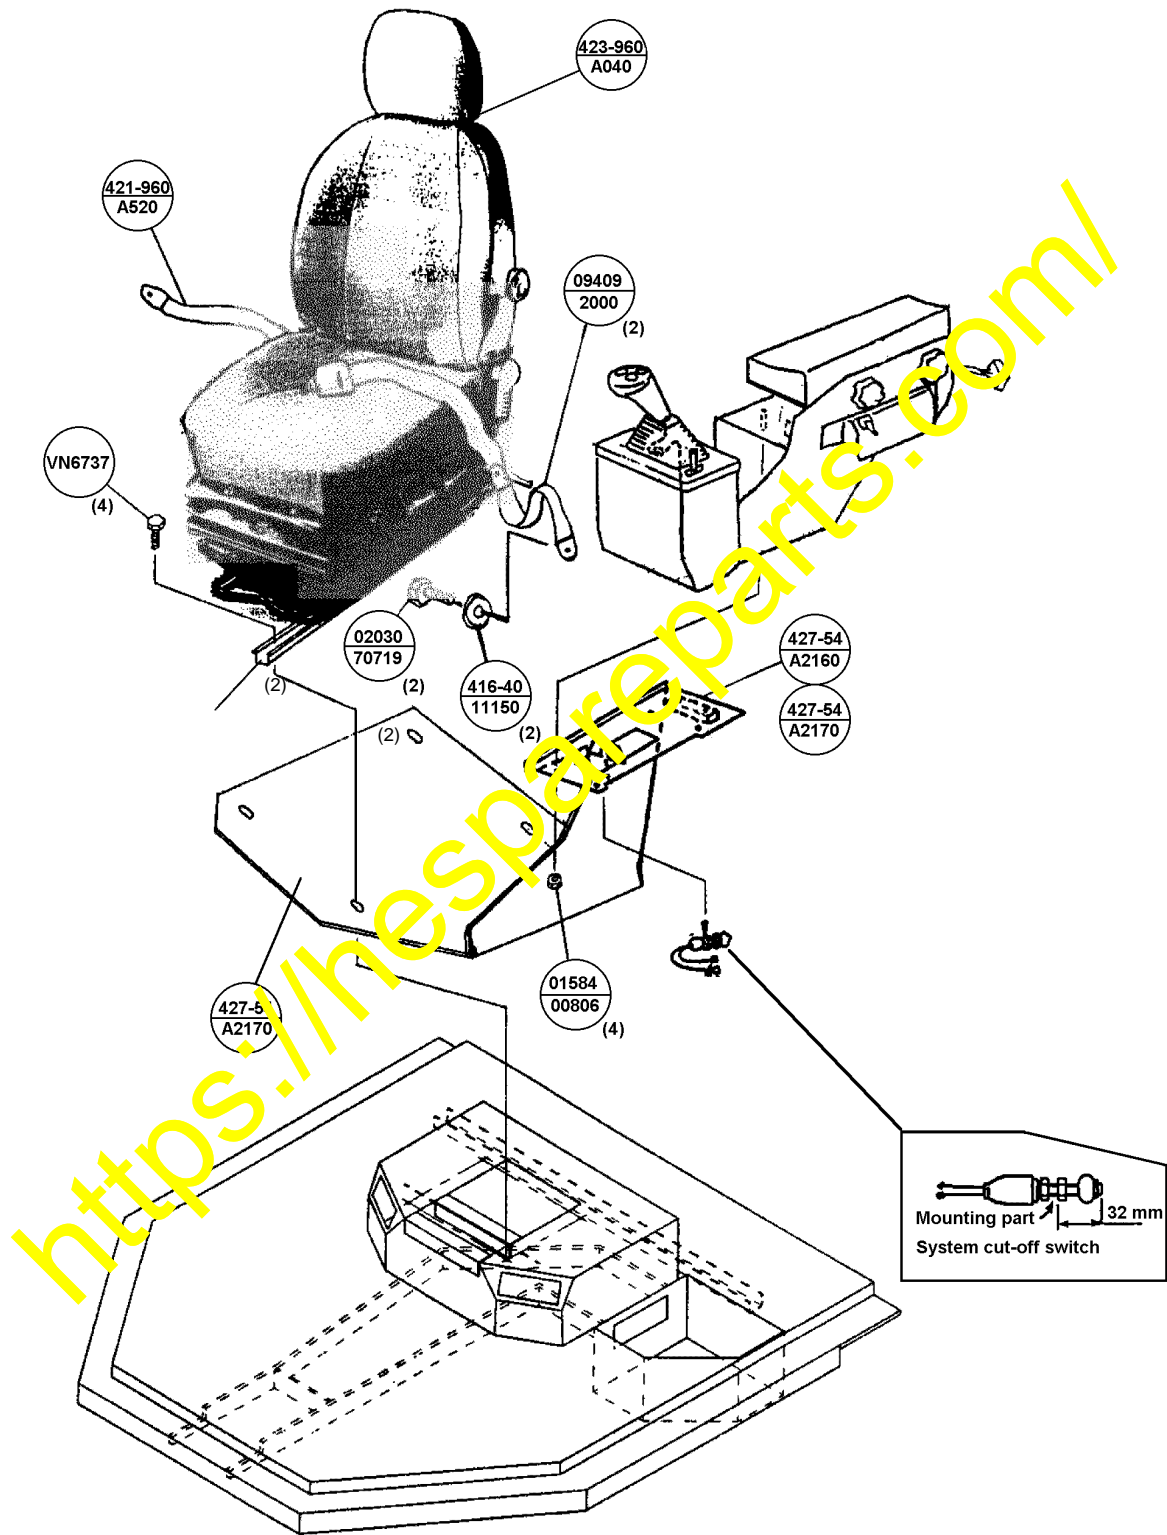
ASSEMBLY OF SEAT COMPONENTS
